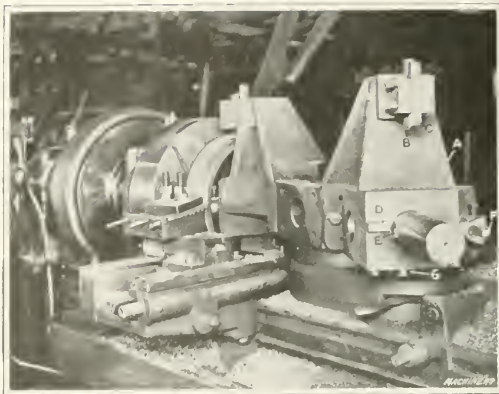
No. 6 Potter & Johnston "Automatic" tooled up for turning and boring at One Setting All Surfaces on Flywheels except Crankshaft Flange Fit
